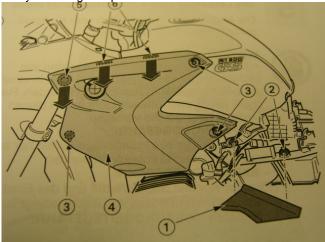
Remove protective cap #1. Remove quick release fuel line by pinching clamp #3. Remove electrical connections #4.
